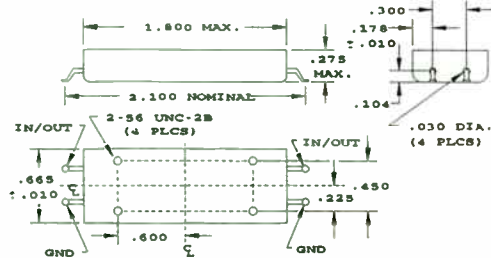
Mounting Styles for Conventionally Assembled Surface Mount Filters.
